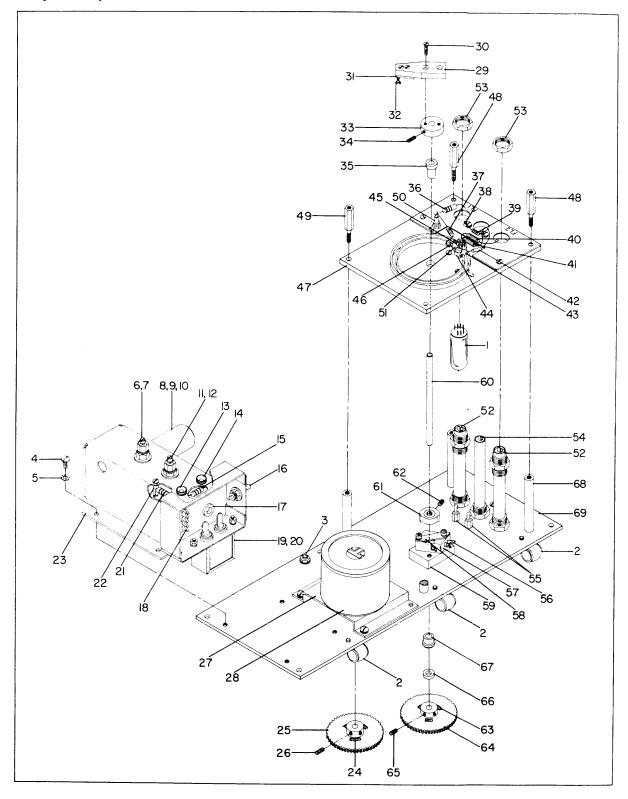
Oscillator and Tracking System Assembly, Exploded View
